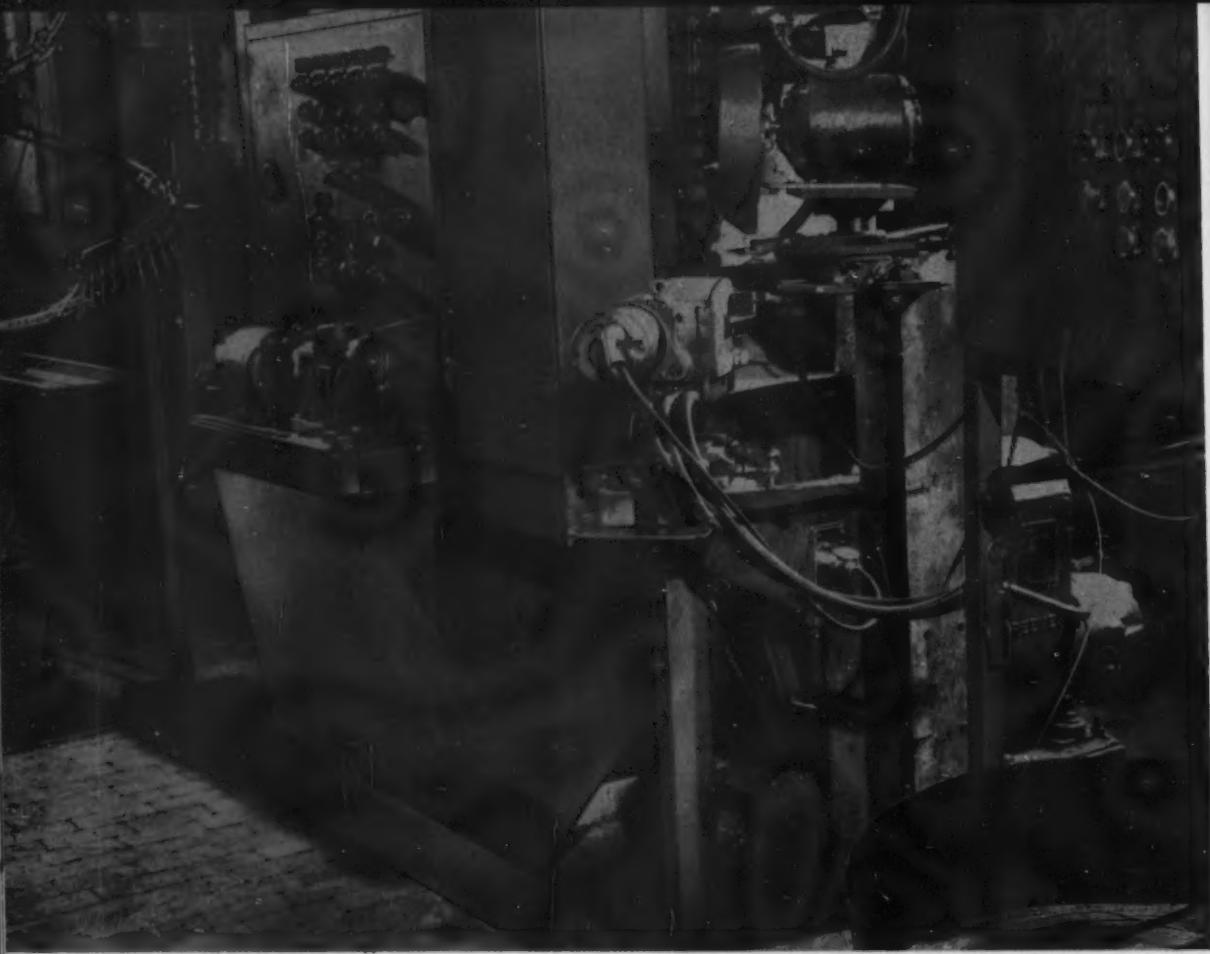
On this aluminizing machine, the valve faces are wire-brushed and coated with aluminum. The coating is then diffused.
